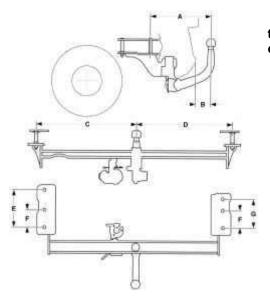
Mounting dimensions trailer coupling with removable ball of "Limousine"
